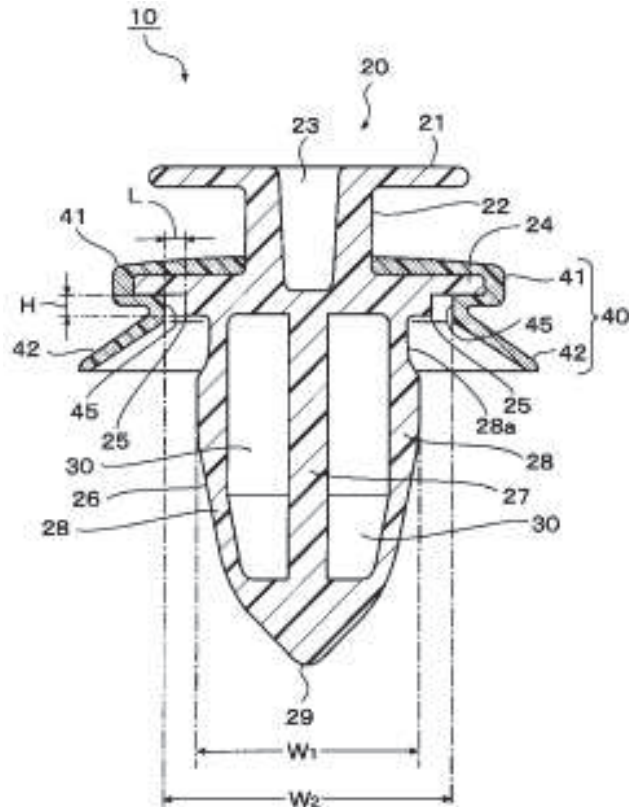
shows a cross-sectional view of Sawaya's resin clip 10, which includes head part 21, leg part 26, and flange part 24. Ex. 1008 ¶ 55.
